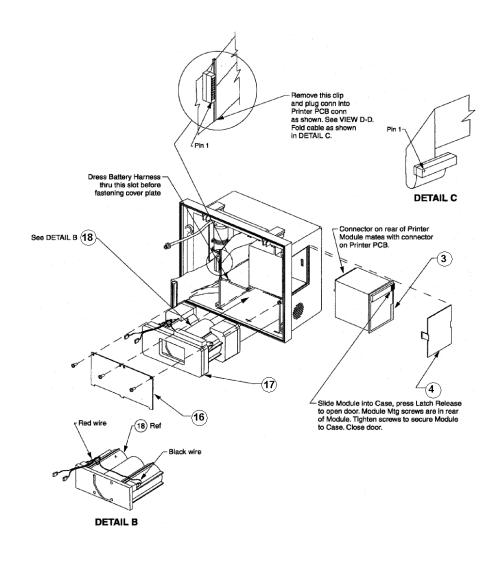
A3 Rear Case Assembly Drawing (2 of 3)
